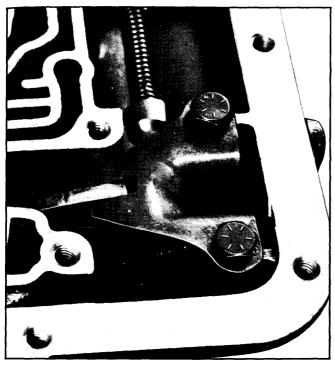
Park Lock Bracket Special Bolt Identification
